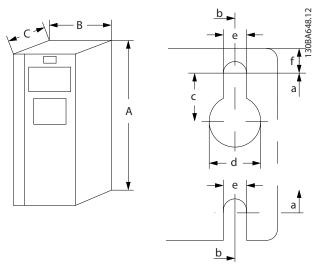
Top and Bottom Mounting Holes (See chapter 8.9 Power Ratings, Weight and Dimensions)
